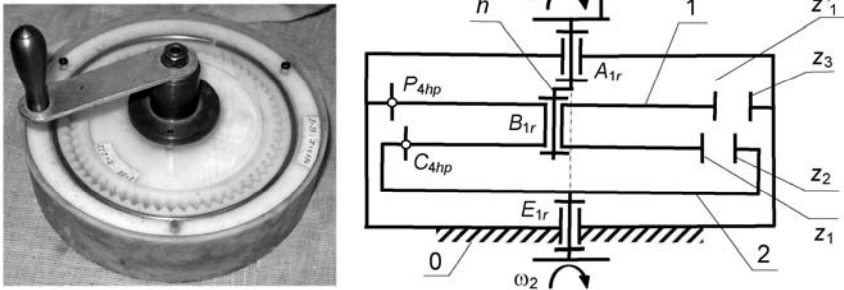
Model of a crank-planetary mechanism with a gear muff with internal involute gearing (Izhevsk Mechanical Institute)
